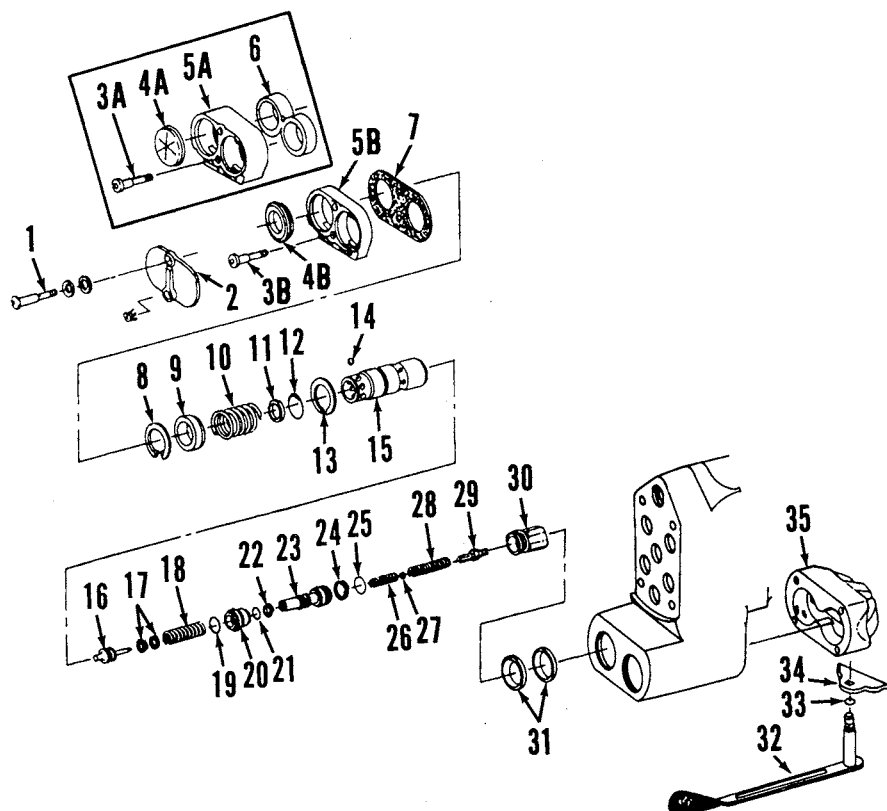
Exploded view of breakaway SCV coupler assembly. Items in inset are used on early style couplers.
